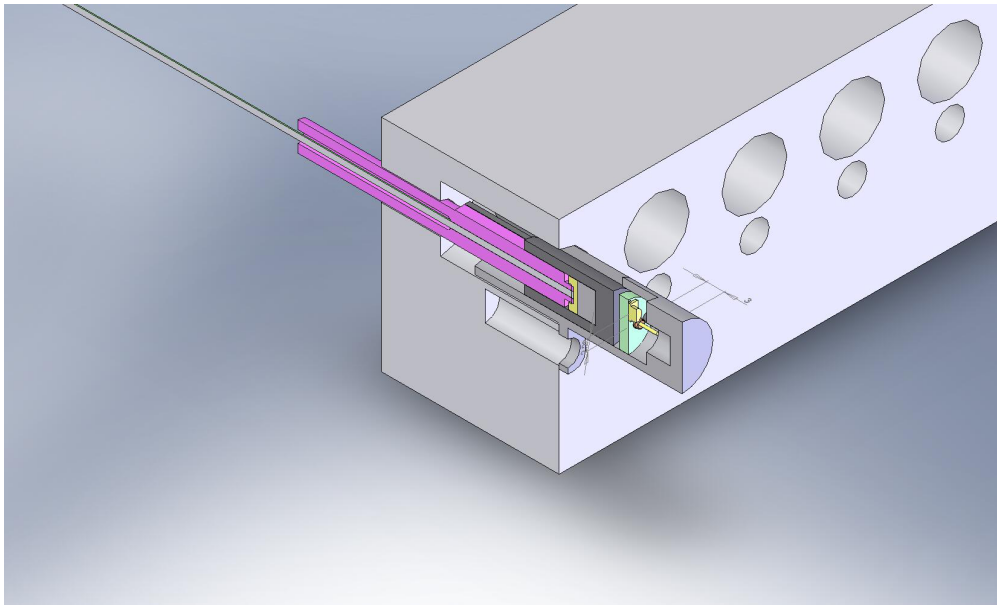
A close-up view of the edge of a PØDule showing how the WLS fibers exit the scintillator bars and couple to the MPPCs.
